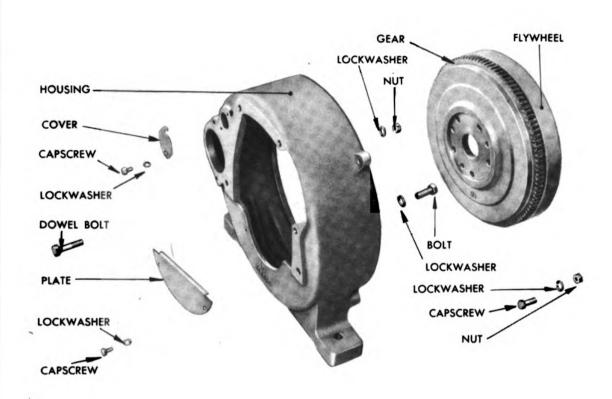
Exploded View of Flywheel and Flywheel Housing.
